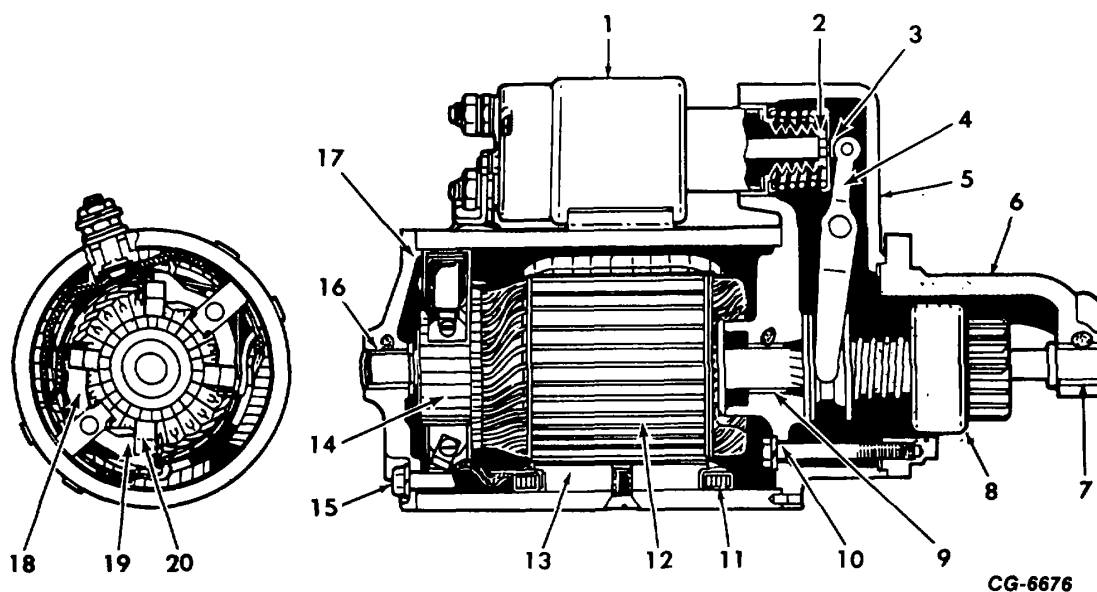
Sectional View of Starting Motor with International Duty Clutch
